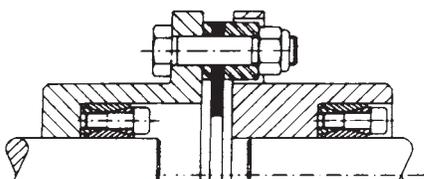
Single flexing coupling fastened with two internal Locking Assemblies
